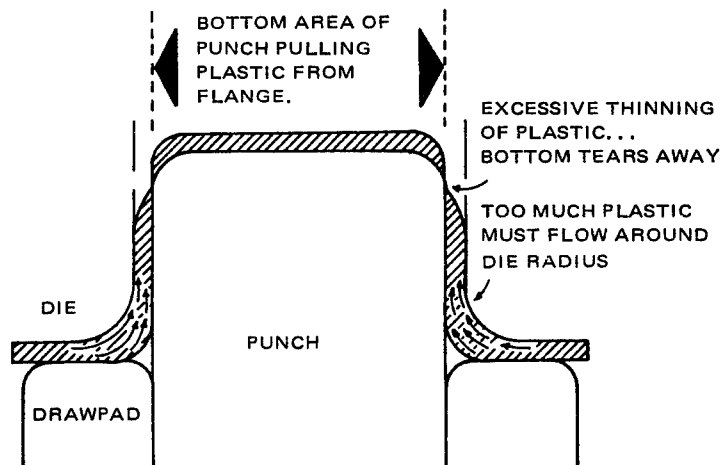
Cross-section of part formed with excessive reduction from blank to part diameter (9)
